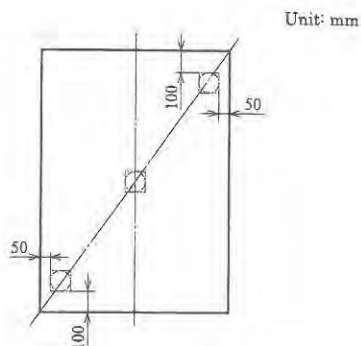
Test piece sampling position (for sheet-by-sheet zinc-coating method)
